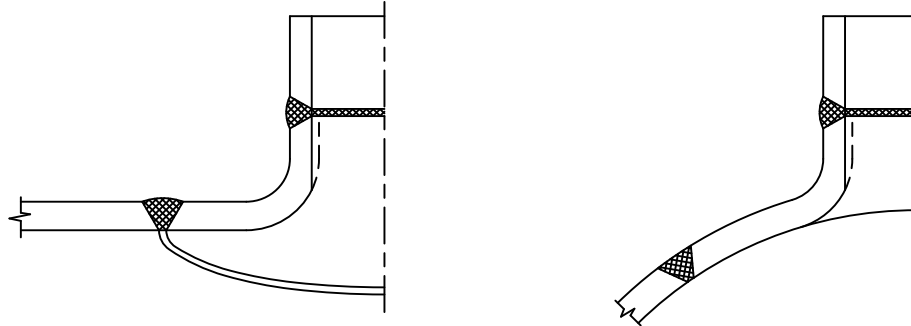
Acceptable Details for Branch Attachment Welds
